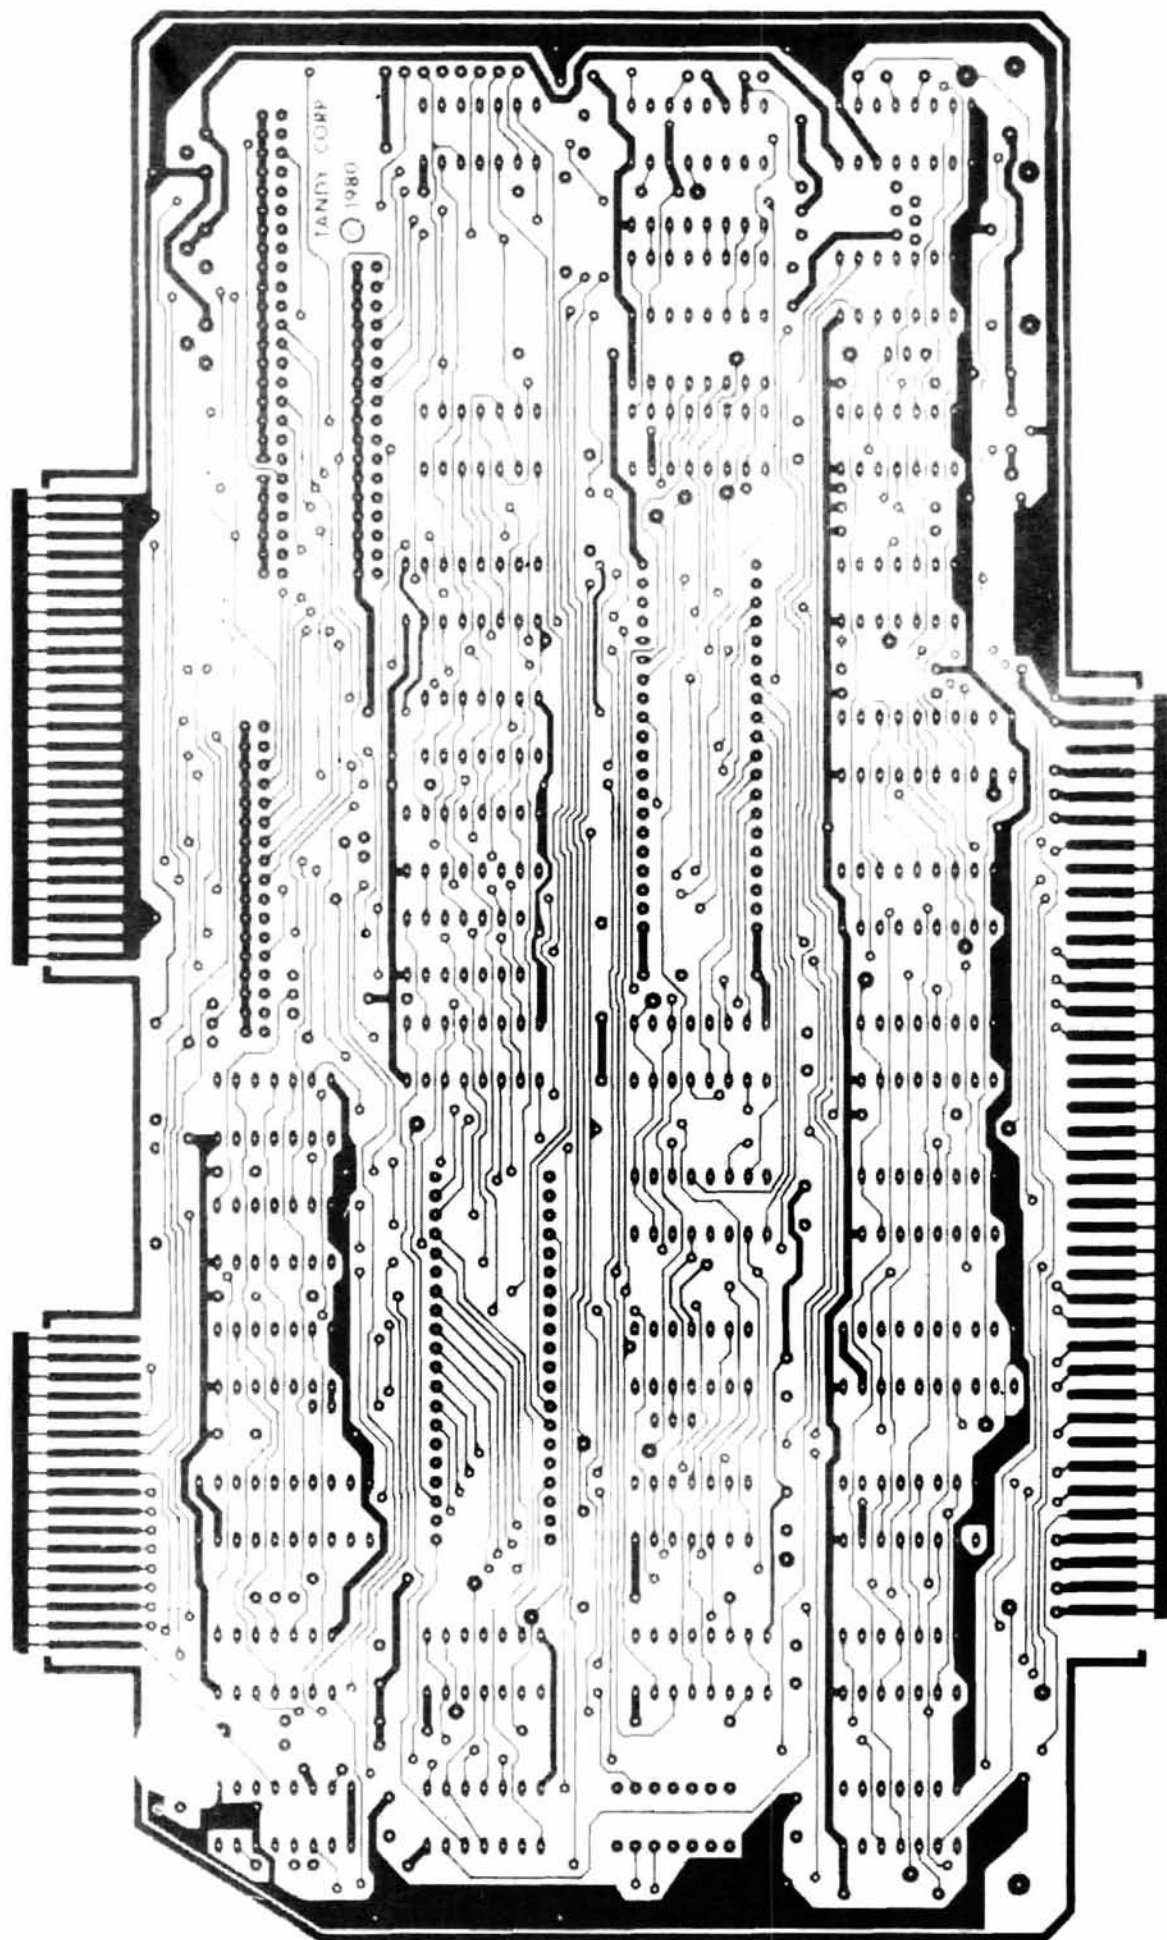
X-Ray View FDC Printed Circuit Board — Circuit Side
